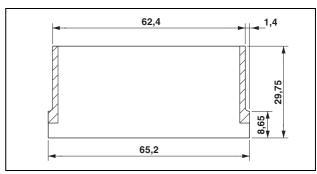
Dimensions of the PCB with housing cover ME-IO 18,8 C 6U 7035
